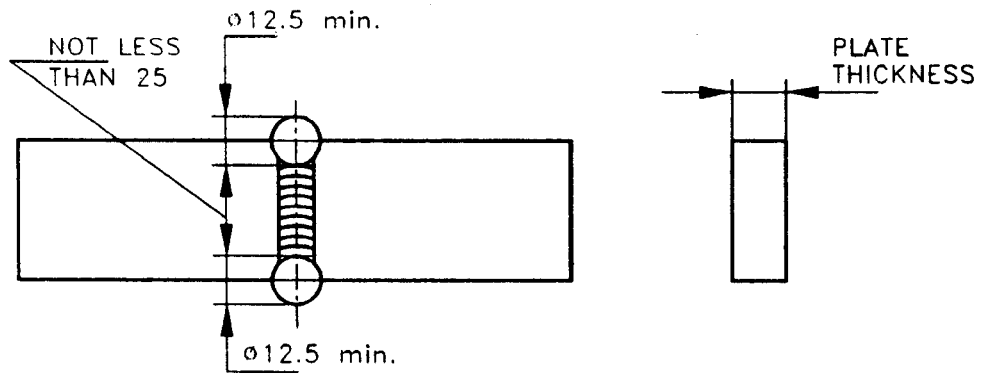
EXAMPLES OF WELDED STUDDED PLATES
